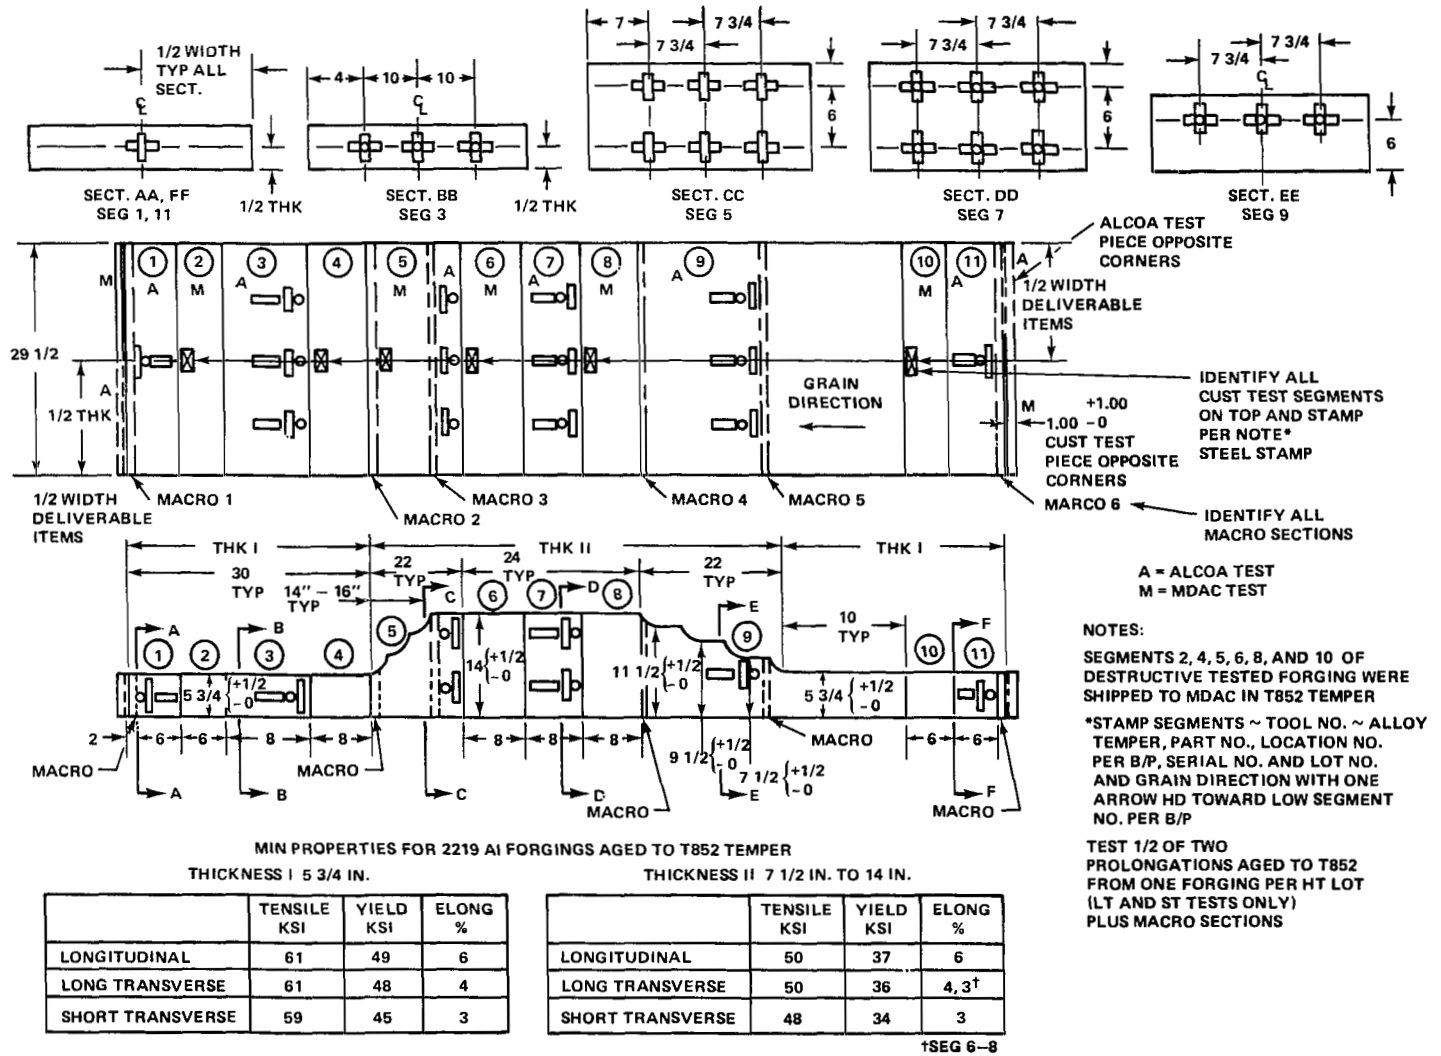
Dimensions and layout for contour hand forging P/N 14A20084.
